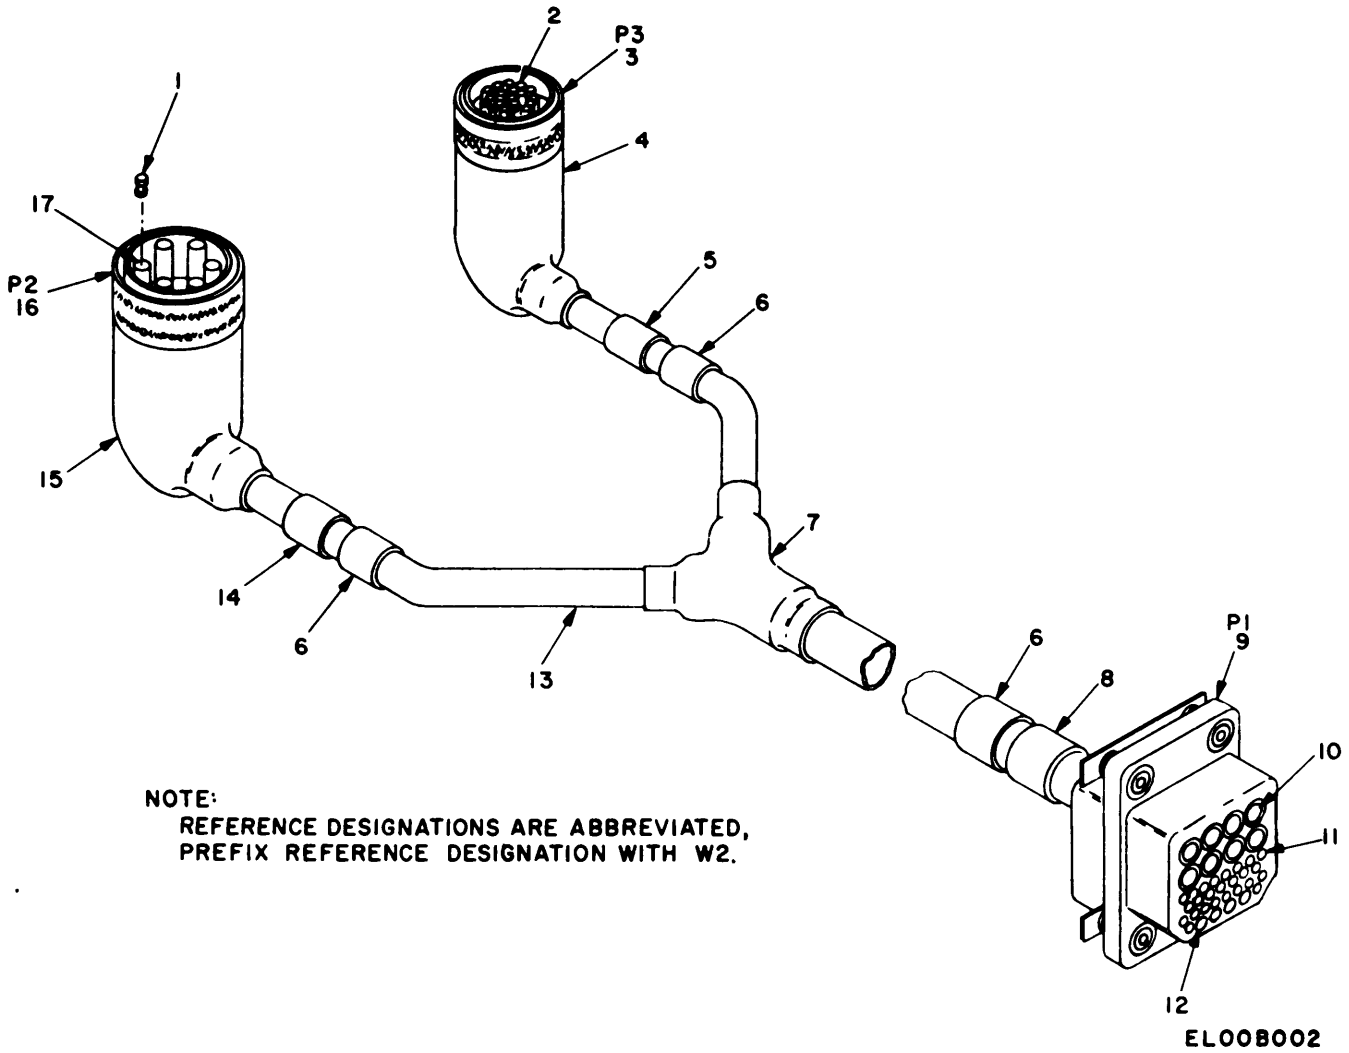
Cable Assembly, Special Purpose, Electrical, Branched CX-10878/TPX-50.
